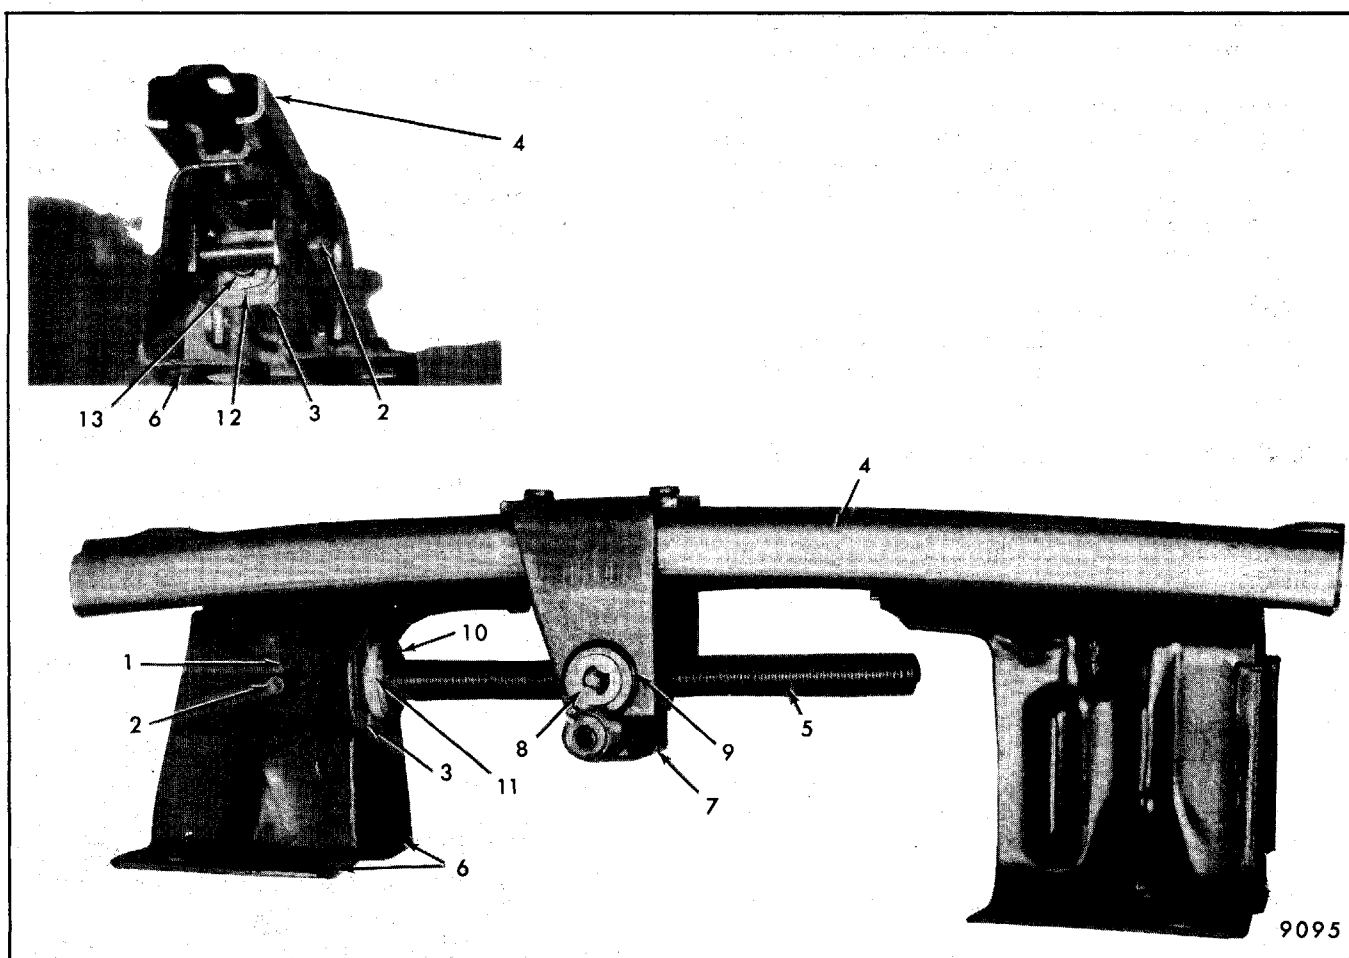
Power Operated Horizontal (Two-Way) Seat Adjuster Components
